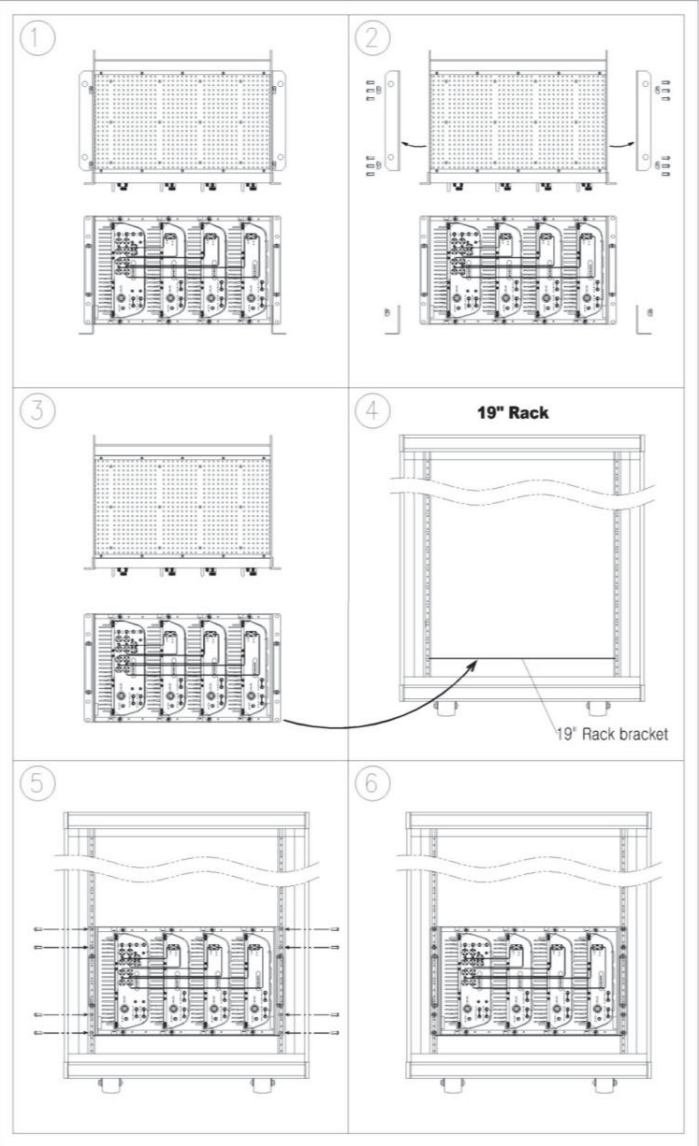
ADX-RU 19" Rack Mount Instructions
